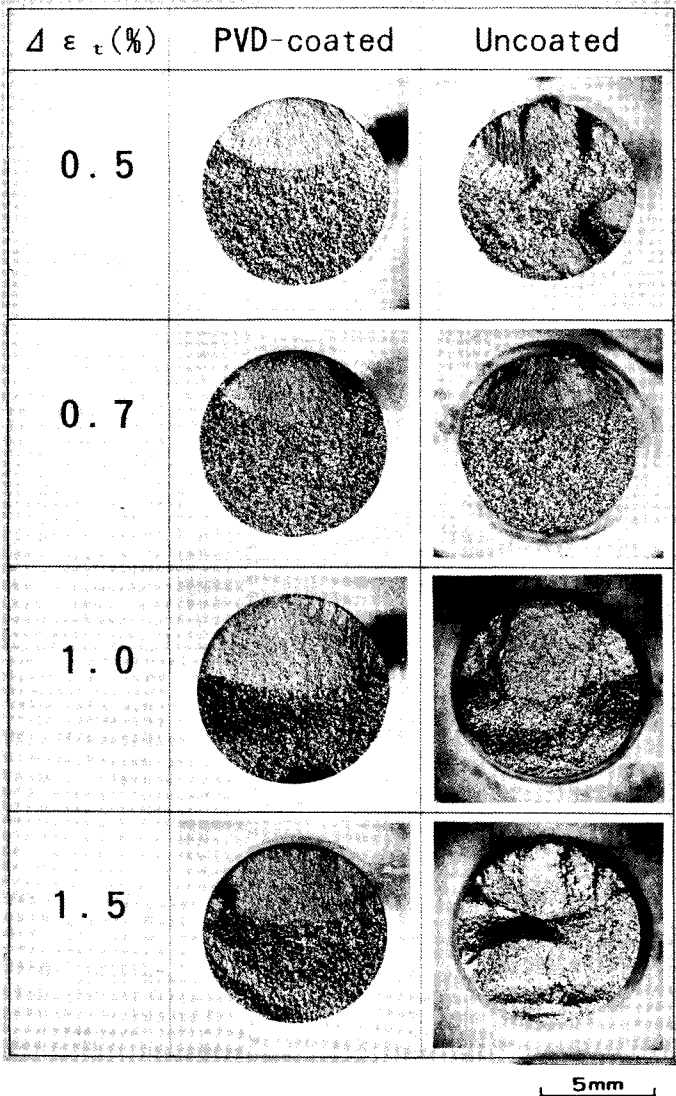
Macroscopic observation of the fracture surface of the coated and uncoated specimens.
